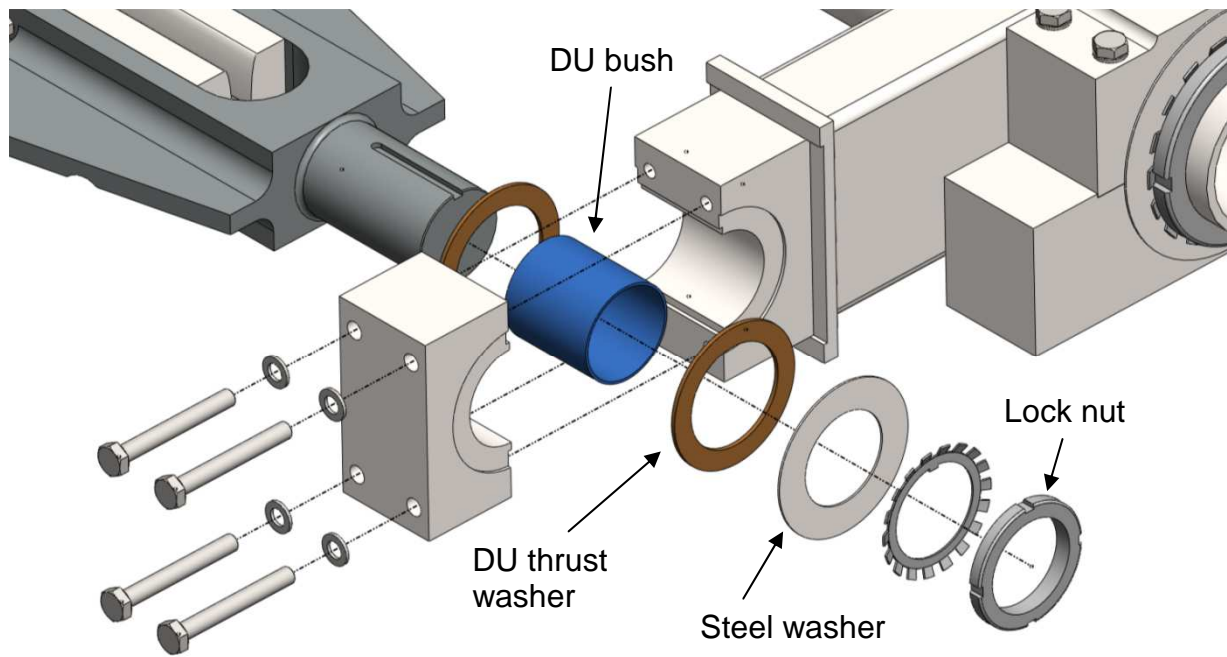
Exploded view of the rotating media used in the pivoting components of Giant Blade
